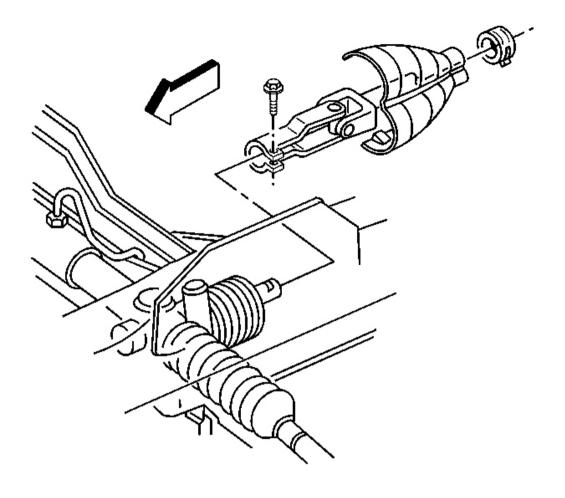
Intermediate Shaft Lower Coupling & Bolt Courtesy of GENERAL MOTORS CORP.
